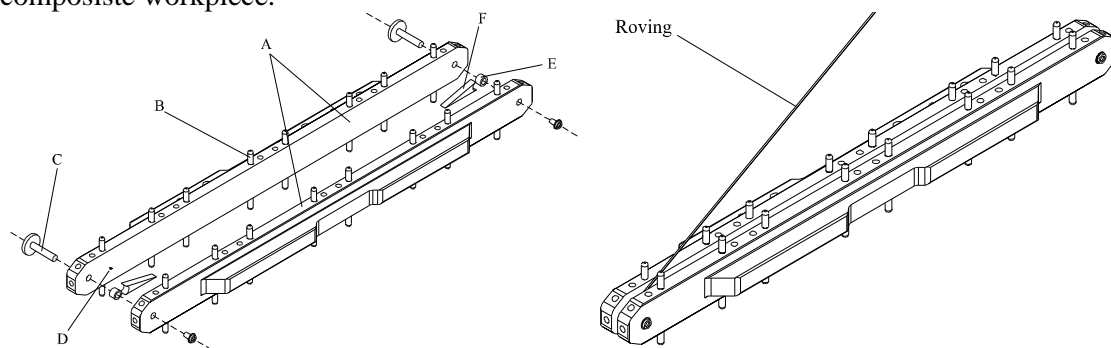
Winding die: A: plates to contain the fibre; B: reference pin; C: flanges; D: bushes; E: filler; F: pin to position the filler
